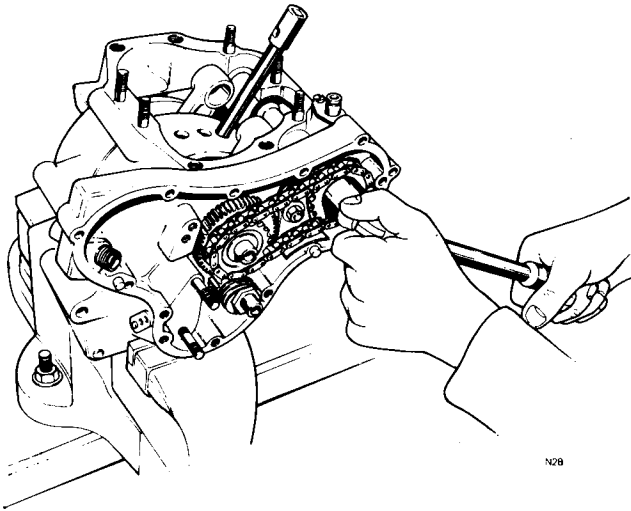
Preventing flywheel turning by use of a bar lodged in a flywheel balance hole
